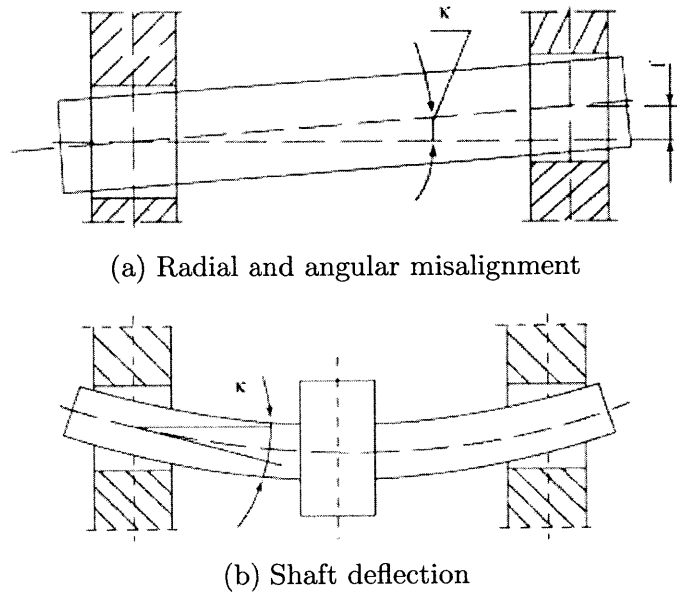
Various types of bearing–shaft misalignment resulting in uneven loading of the bearing balls and pre-mature fatigue failure [42].
